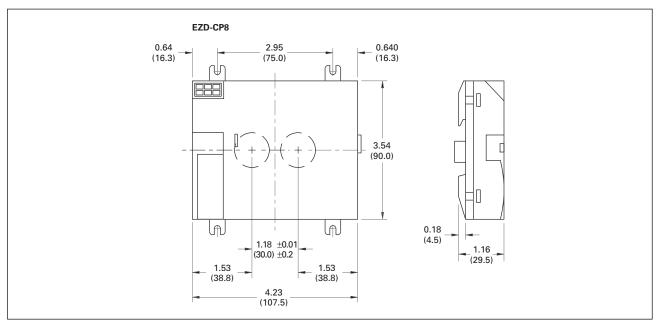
EZD-CP8 Series Dimensions in Inches (mm), Drawing Number MD05013006E
